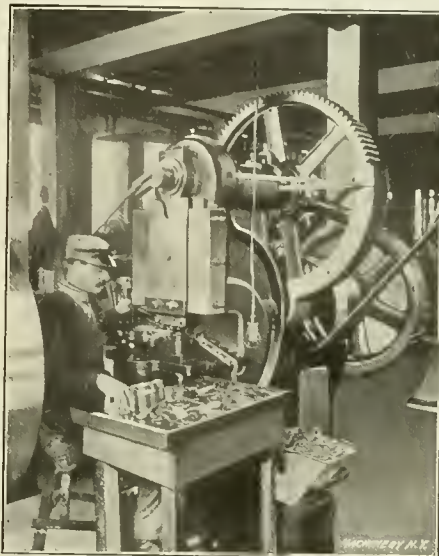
Piercing the Rivet and Bushing Holes in Side Pieces
